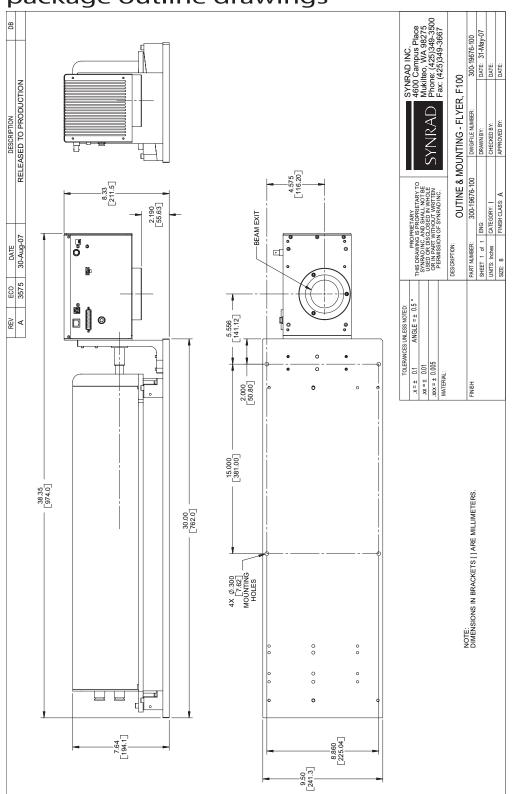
FH Flyer marking head package outline and mounting dimensions
